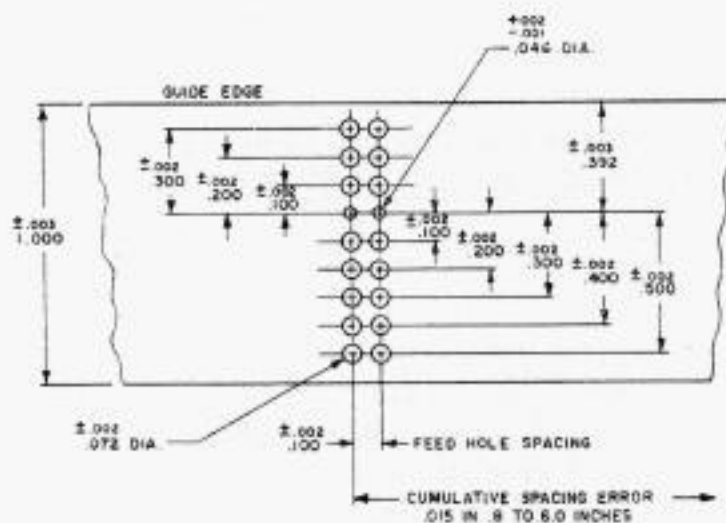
Dimensions and tolerances for 8-level Chad Tape
